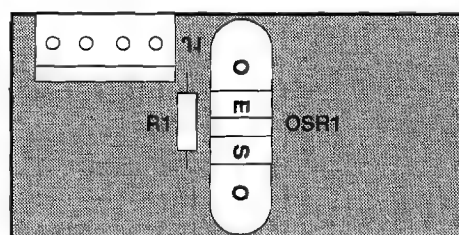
Compact Hard Drivin' Motor Amplifier PCB Assembly
